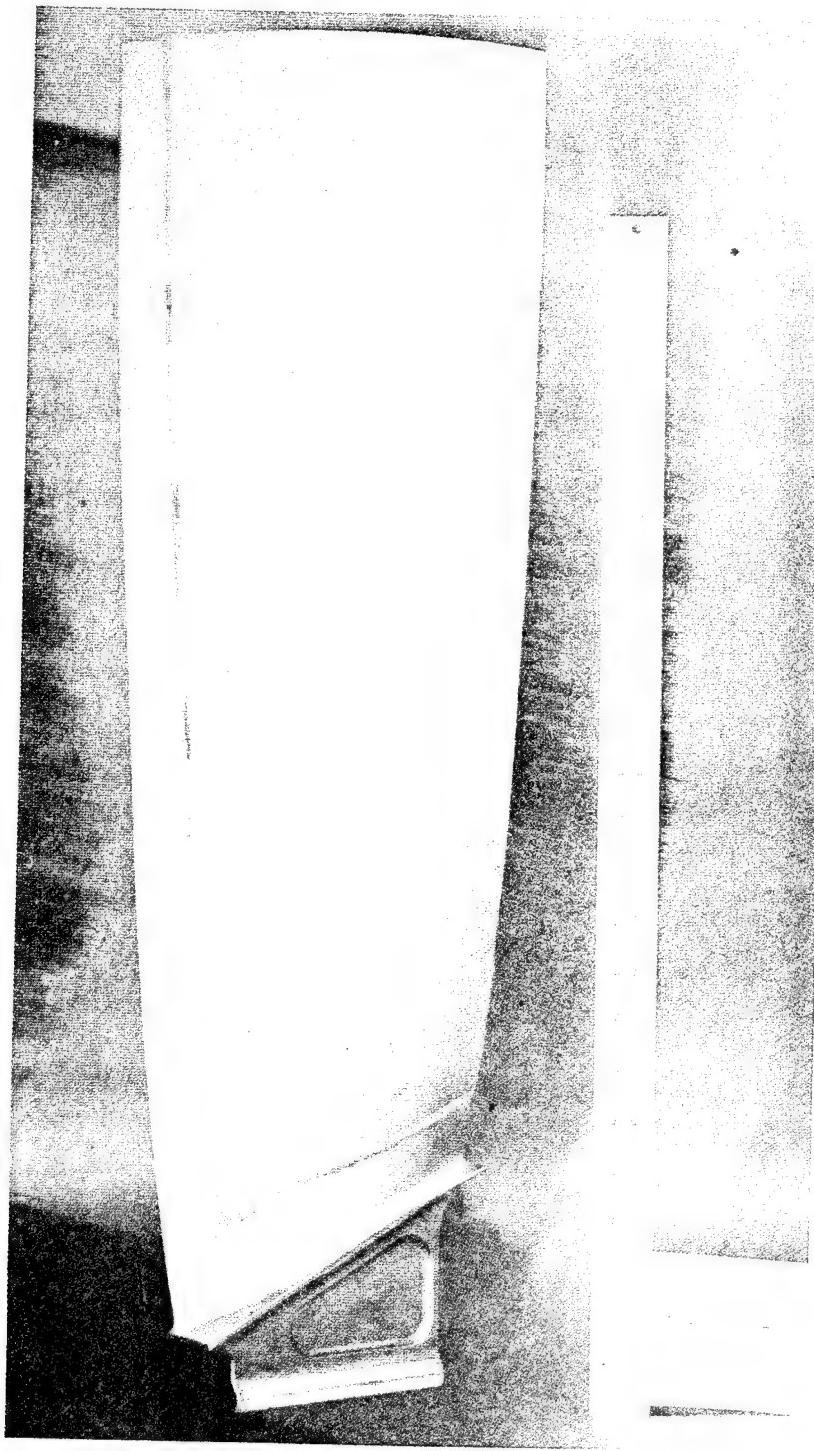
Superhybrid - CF6 TiCom Prototype Blade,
